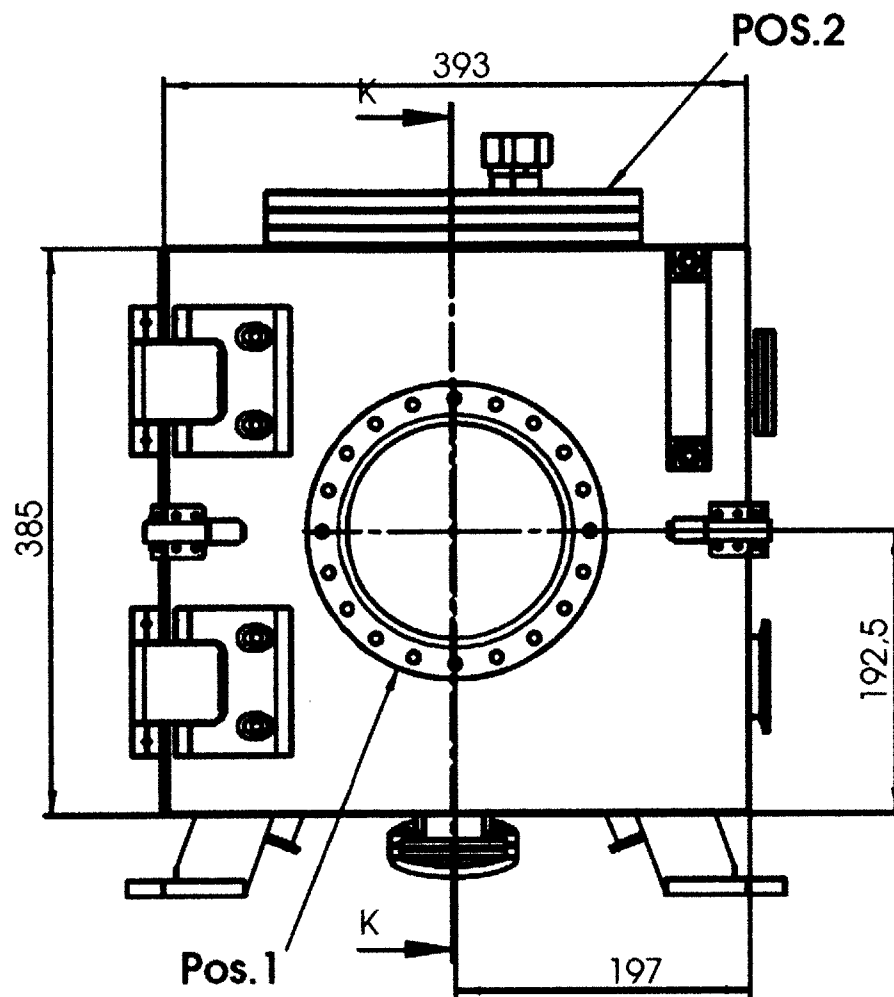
oCVD chamber engineering drawings – close-up view of door and chamber front side
